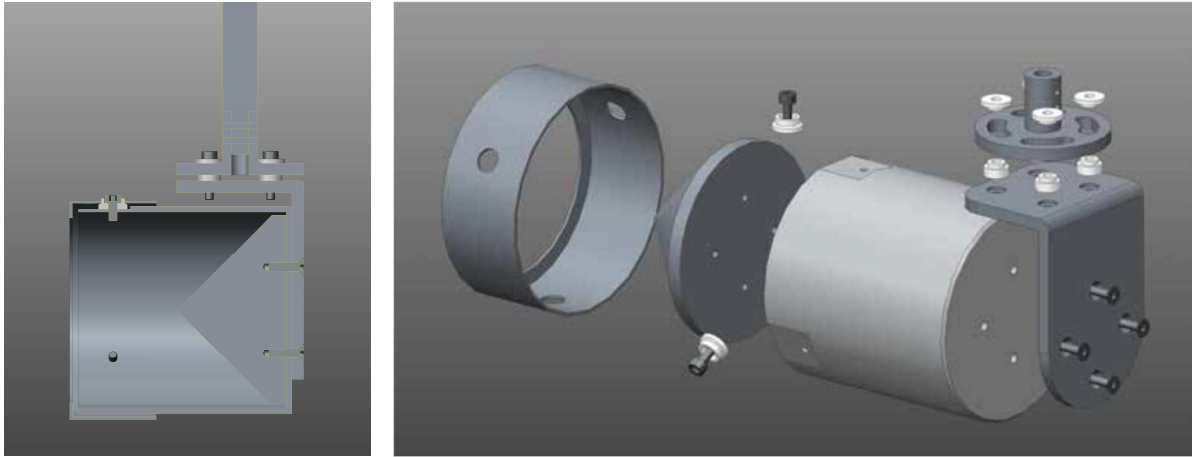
CAD drawings of the RIB Faraday cup.
